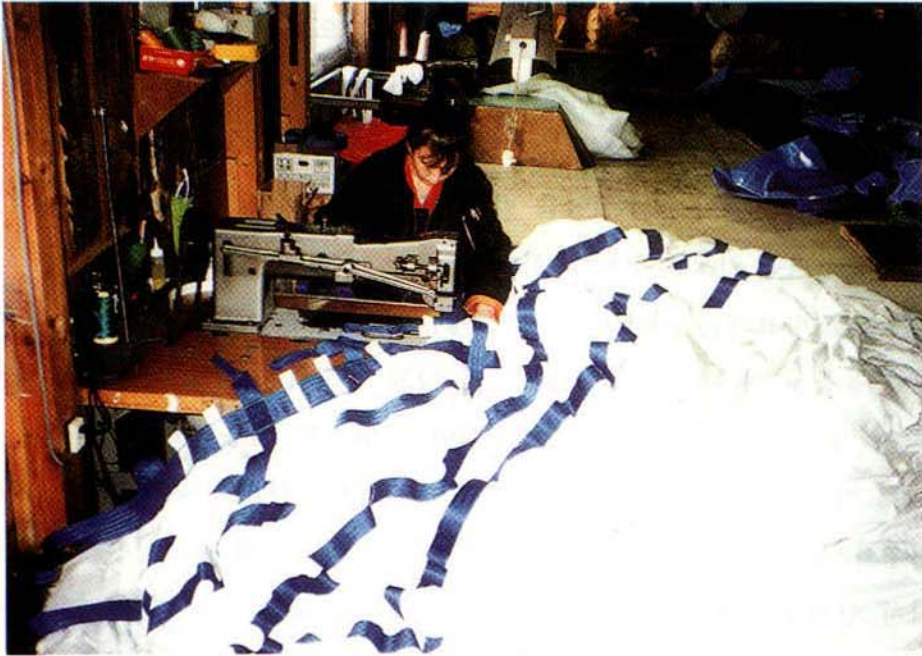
Sea anchor workshop with division of labour in japan.
